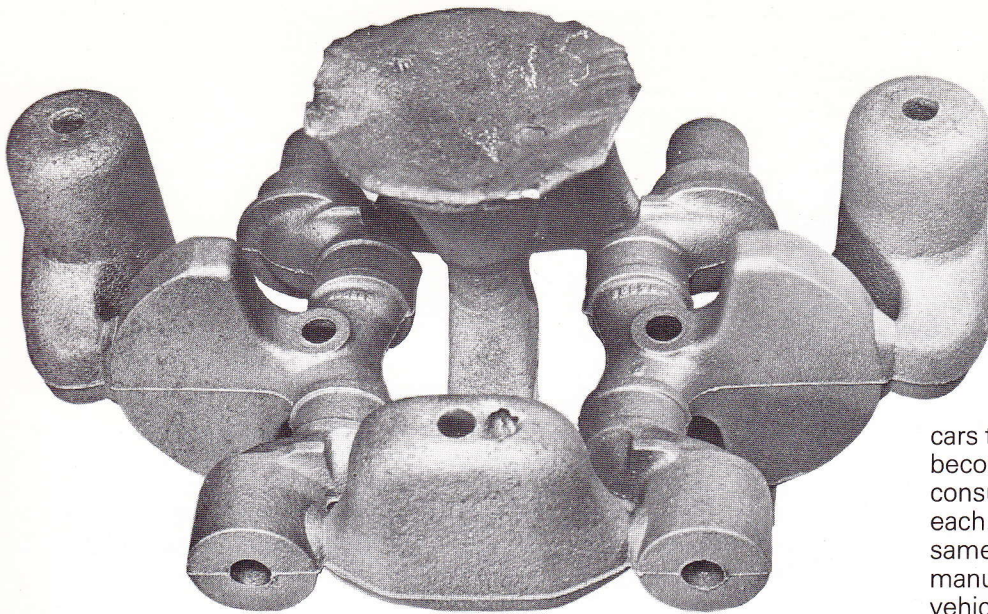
Cluster of spheroidal iron crankshafts for the Fiat 500.
